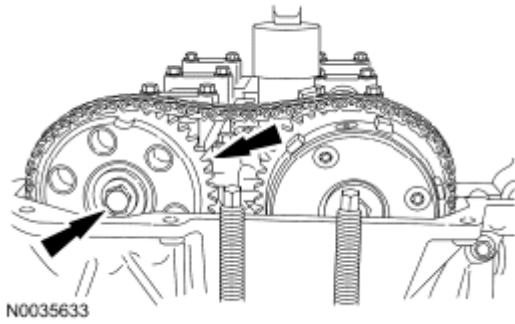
Locating Exhaust Camshaft Drive Gear & Bolt
